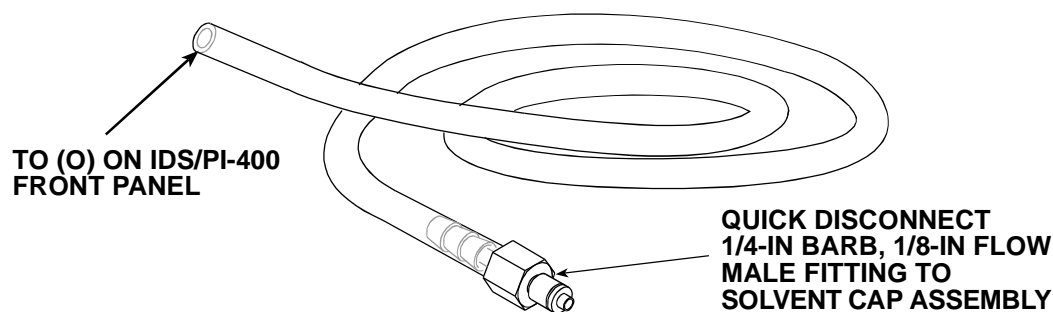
Solv Pump Supply Tubing Assembly (9600-780)
